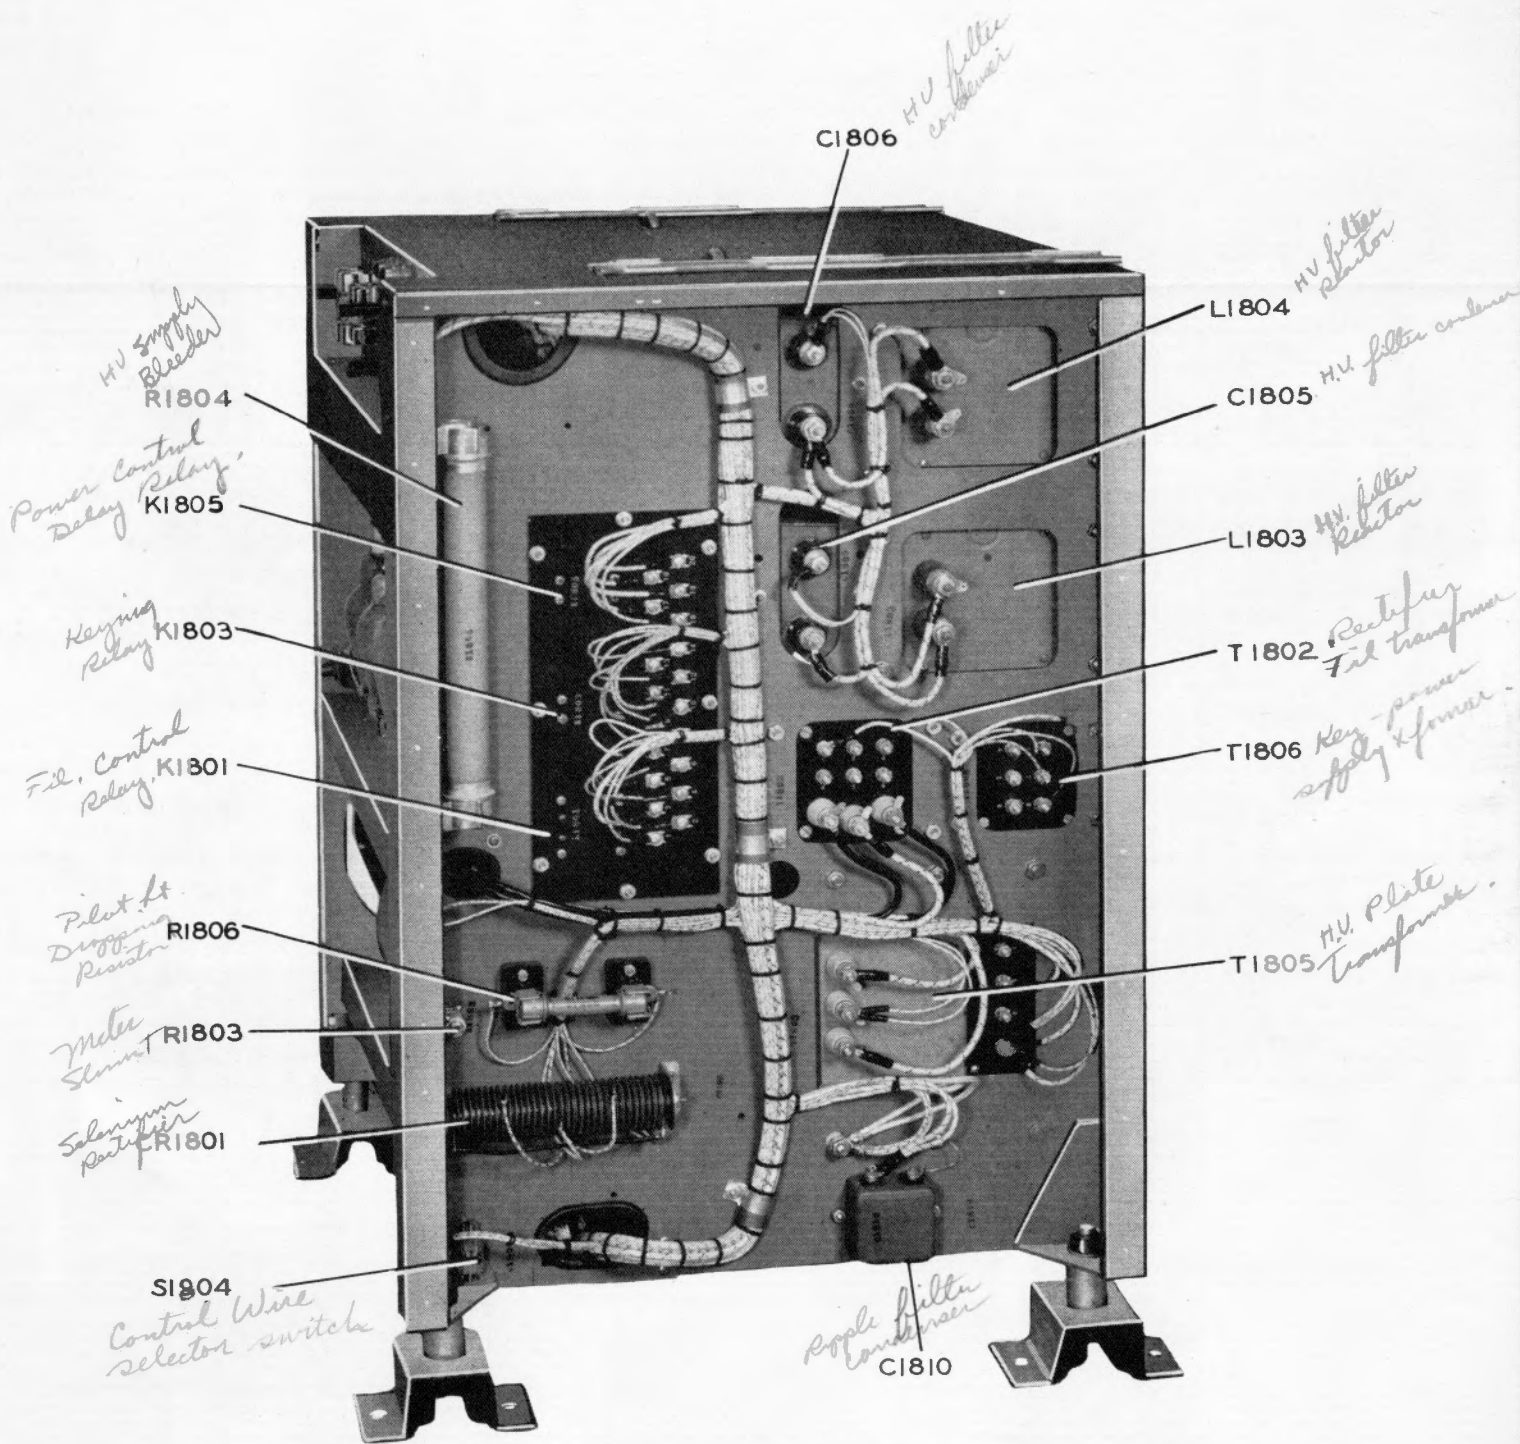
Type COL-211101 Motor-Generator-Rectifier Power Unit
